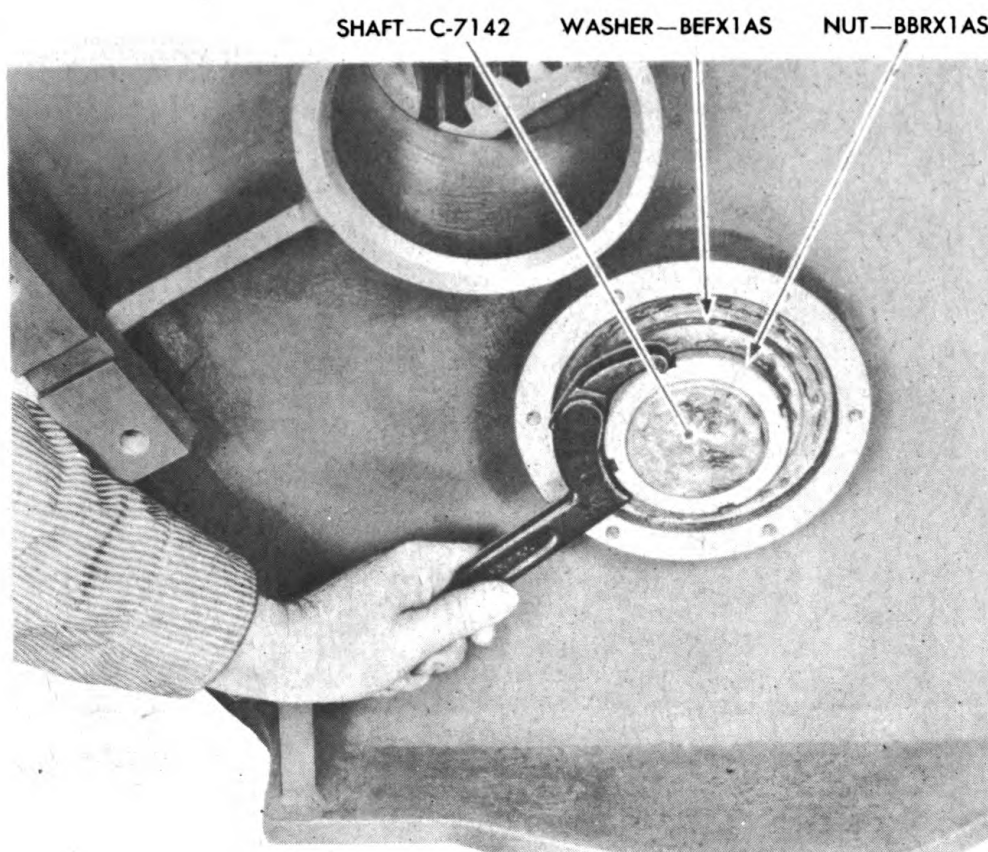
Removing Elevating Handwheel Gear Mechanism Assembly from Top Carriage
